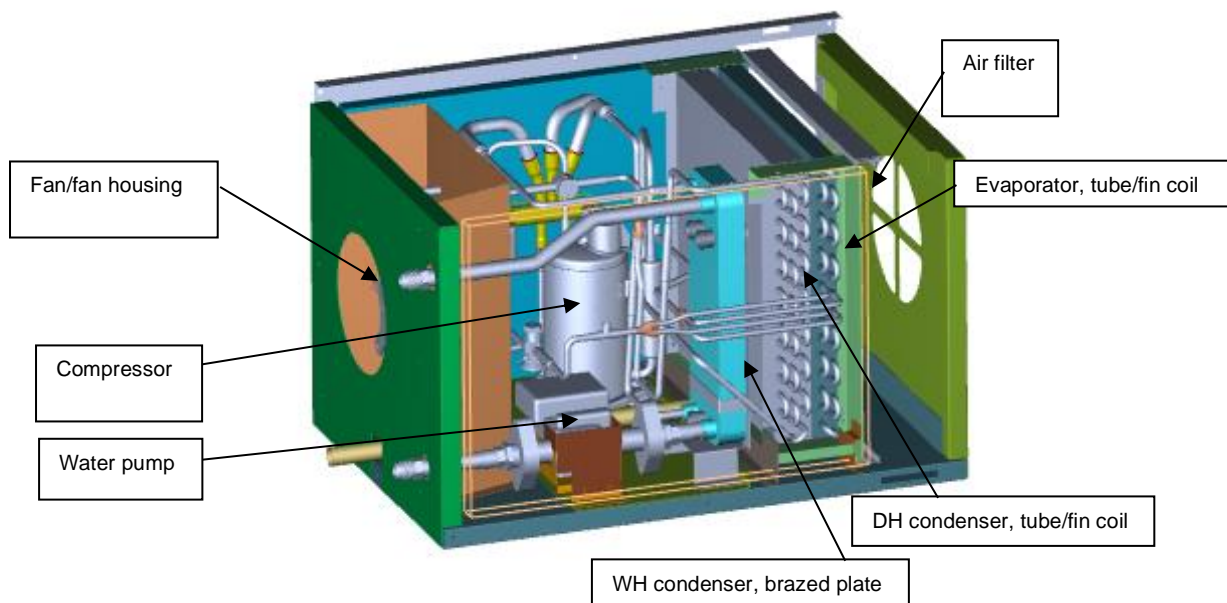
CAD drawing of field-test prototype WH/DH module.
